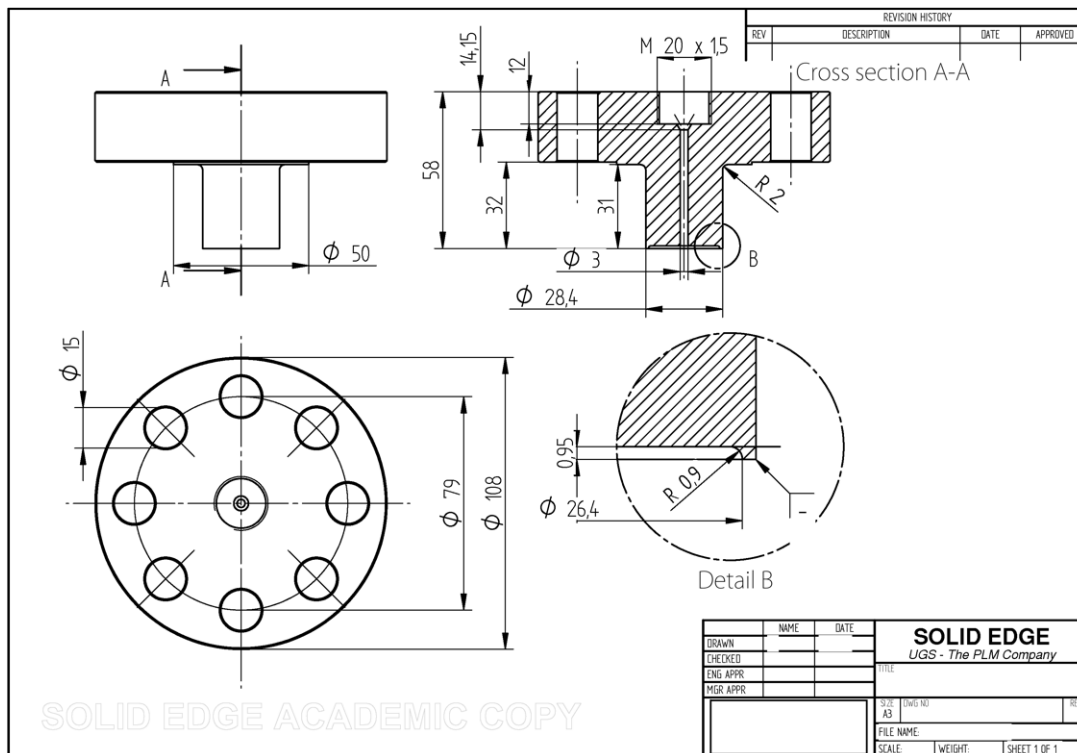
Technical drawing of cover flange.<sup>[28]</sup>
